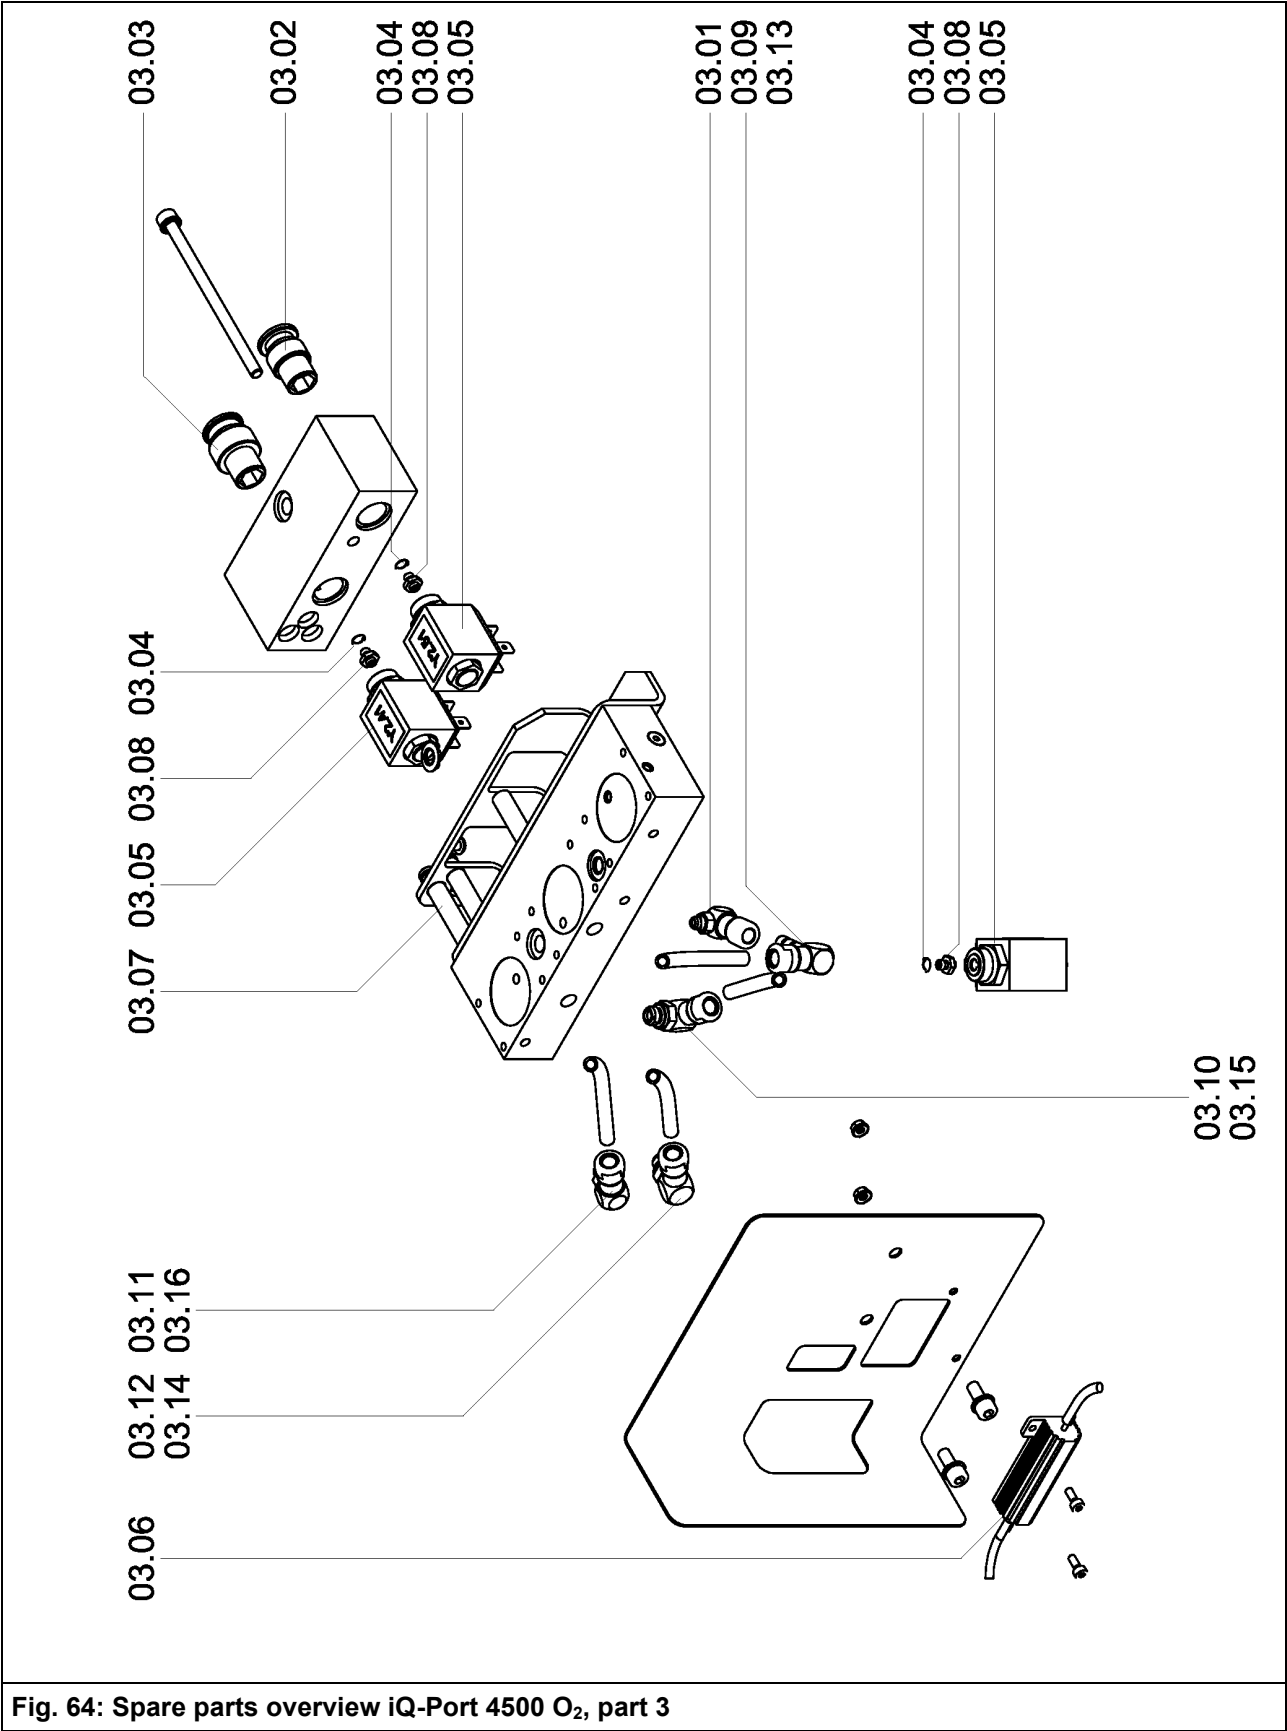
Spare parts overview iQ-Port 4500 O₂, part 3
